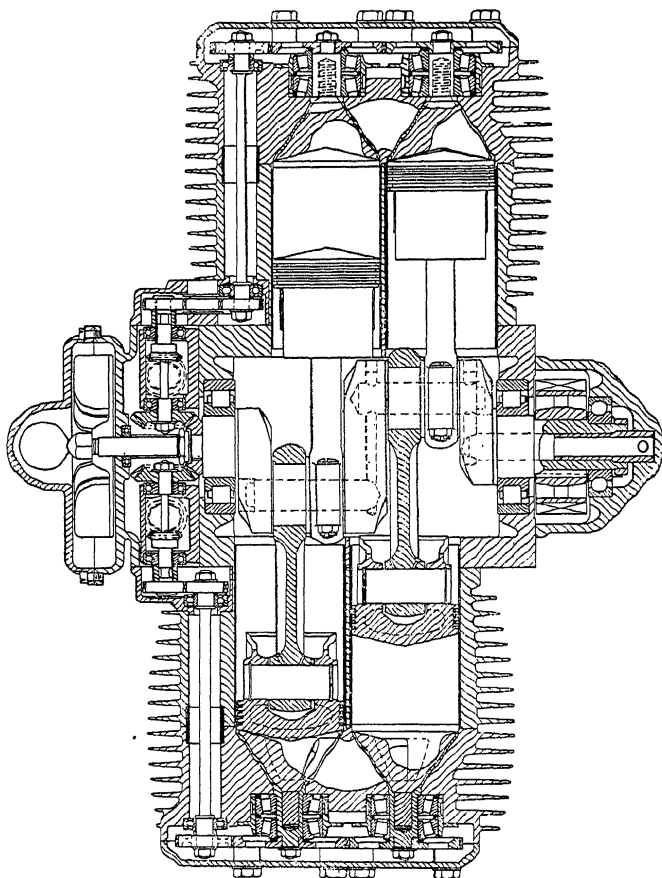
The Aspin rotary valve opposed cylinder engine.
